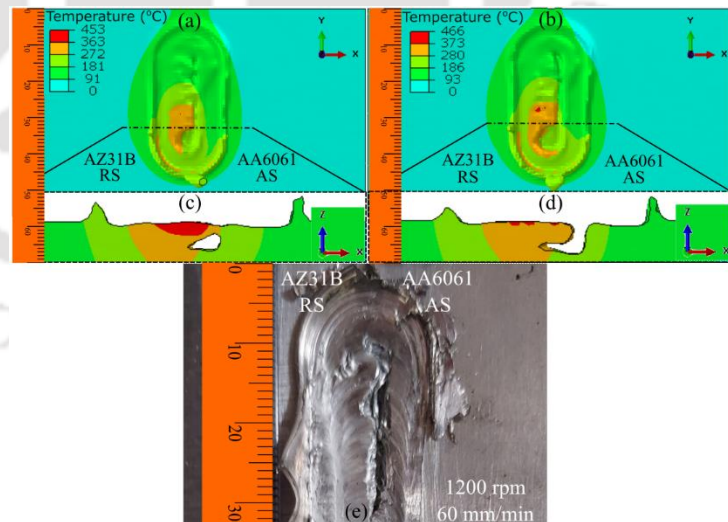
Comparative illustration of the progress of FSW at 1200 rpm and 60 mm/min with (a) tool as shown in Fig. 5.51 (a), (b) tool as shown in Fig. 5.51 (c), (c) cross-sectional view of the defect in Fig. 5.54 (a), and (d) cross-sectional view of the defect in Fig. 5.54 (b) and (e) experiments on FSW
